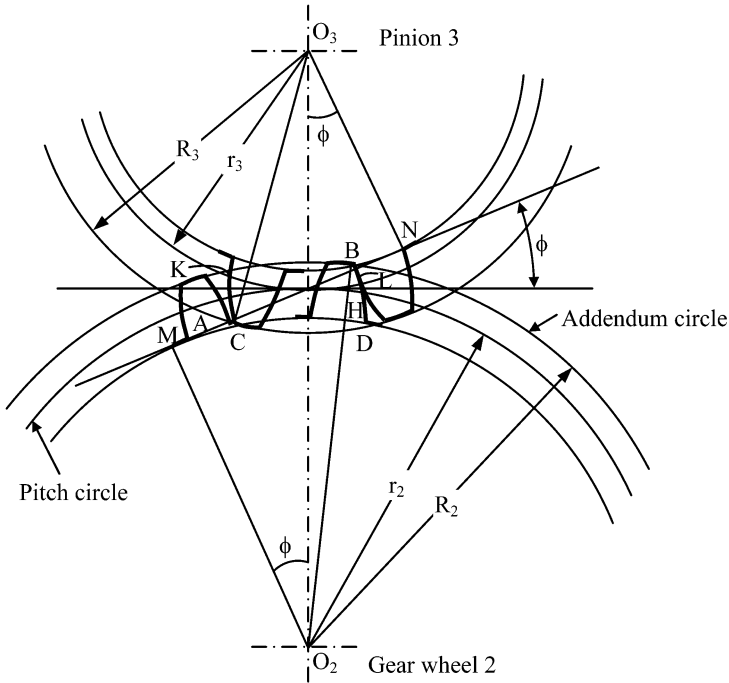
Engaging and disengaging positions of a tooth pair
